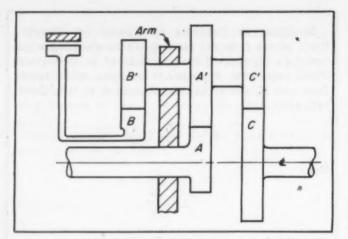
Compound external planetary unit with floating arm which revolves idly while sun gear A drives and C is driven, gear B being fixed
